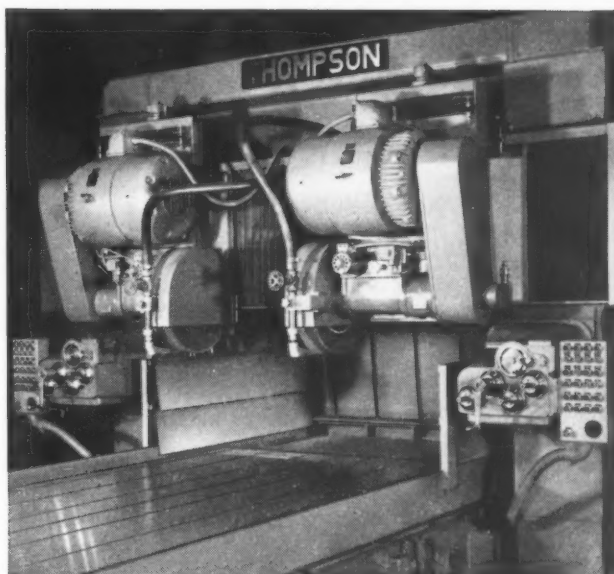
Close-up view of the two vertical heads and controls of the "Hydrail" machine shown in Fig. 1
